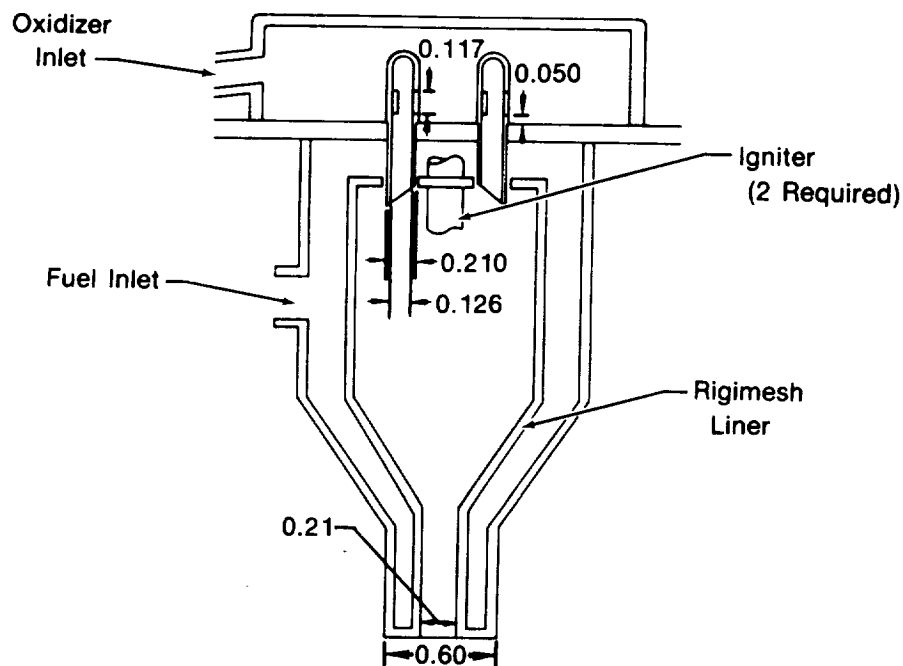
Thrust Chamber/Injector/Nozzle Assembly
